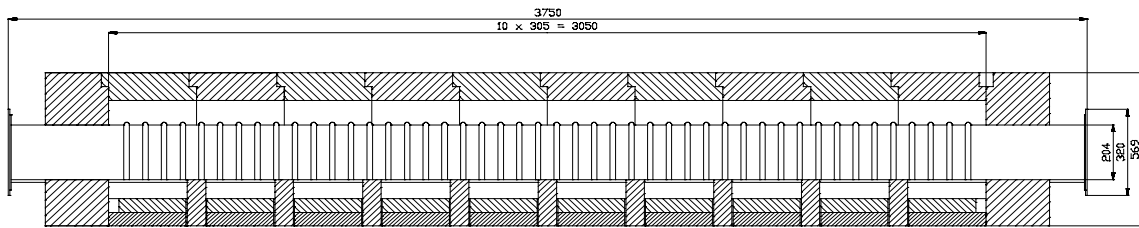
Global dimensions of the heating section of a real furnace (side view).
